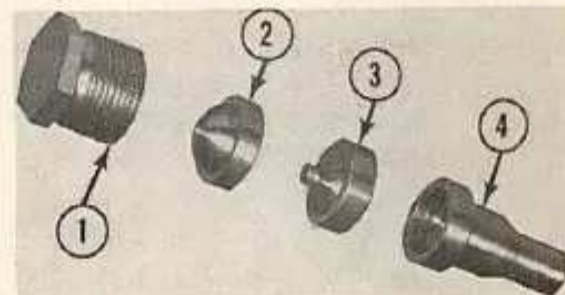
Energy cells should be removed and cleaned when servicing injectors.
